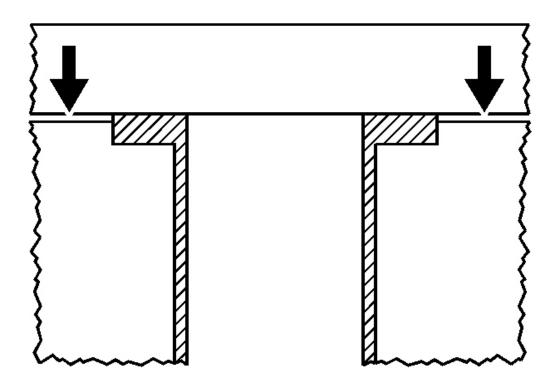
View Of For Properly Cut Cylinder Bore Sleeve Courtesy of GENERAL MOTORS CORP.
